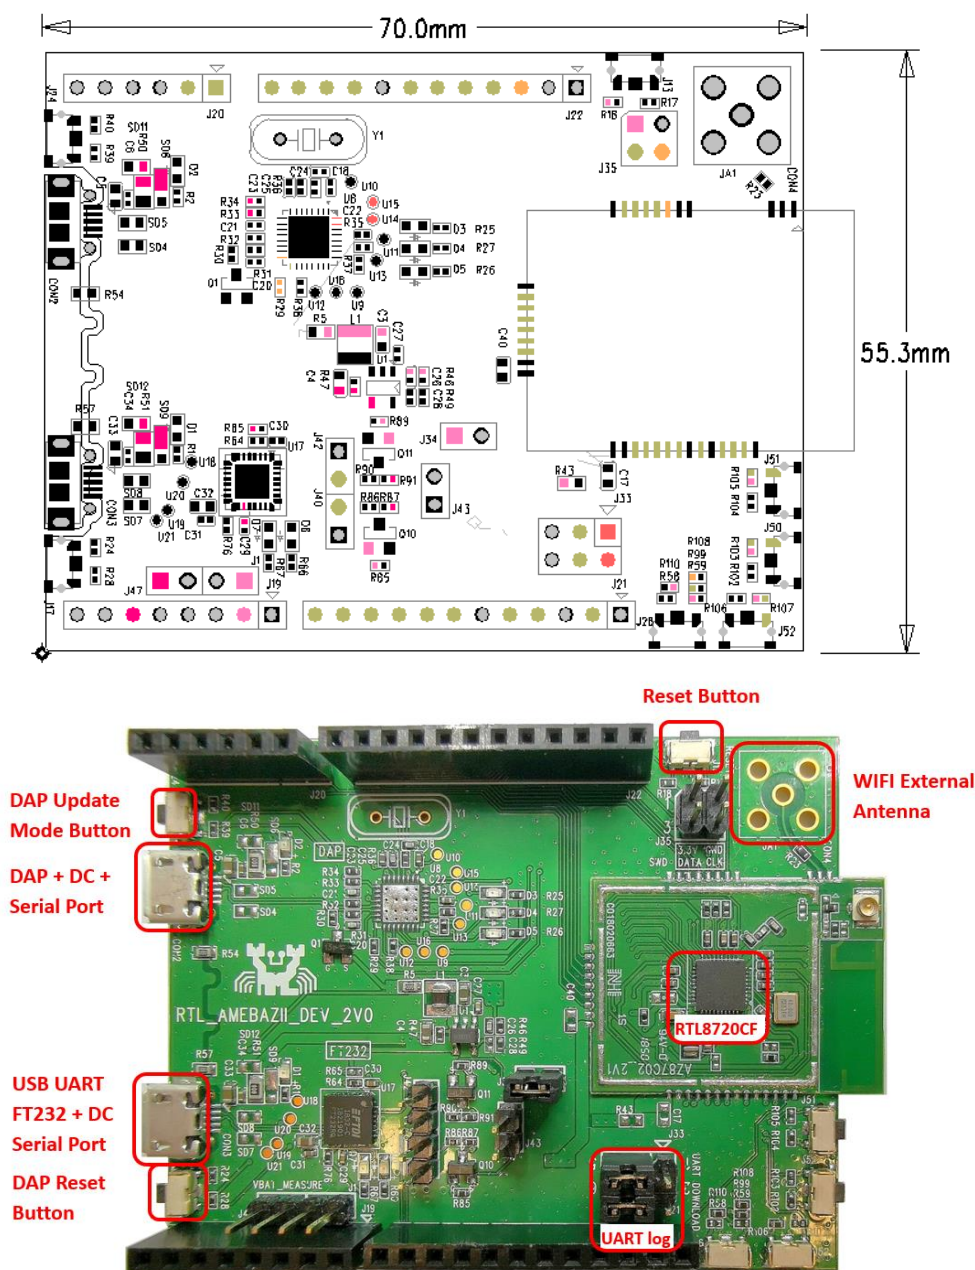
Ameba-ZII 2V0 Dev Board PCB Layout
